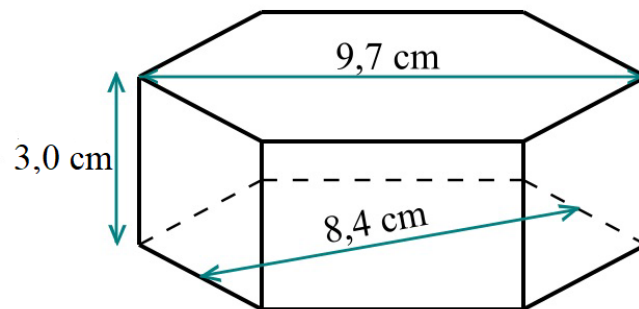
The dimension of the bolt used to make the first tensile specimens
